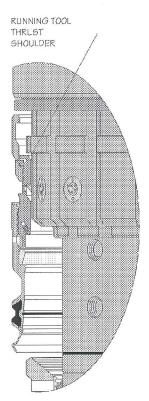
Seal Assembly properly snapped on the Running Tool shear pins
